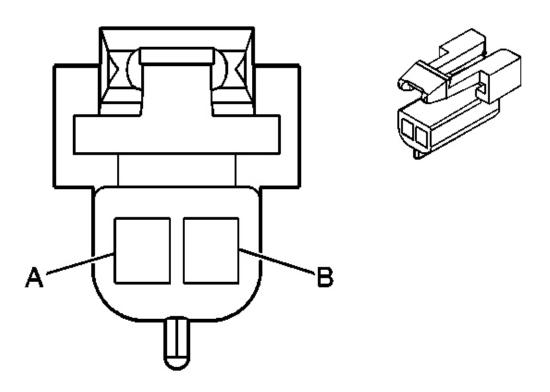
Speaker - Right Front Tweeter (UQA) Connector End View Courtesy of GENERAL MOTORS CORP.
